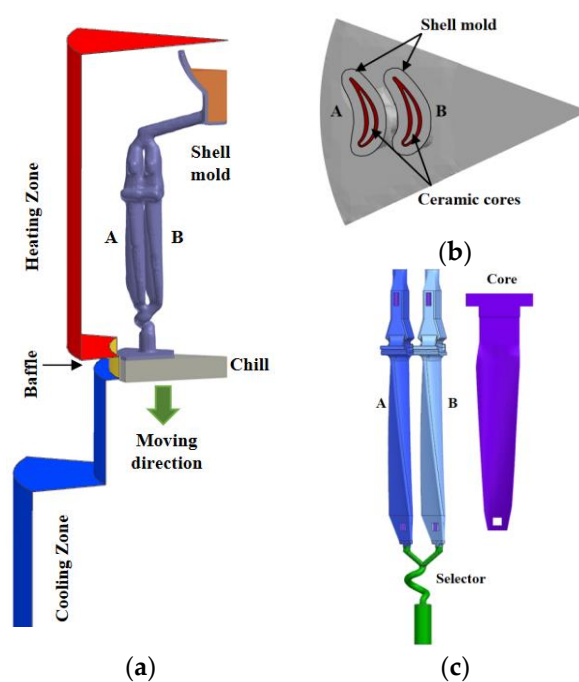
Numerical model for temperature field calculation: (a) Schematic diagram of the mold and casting assembly positioned in the Bridgman furnace; (b) Cross-sectional schematic of the casting within the ceramic shell; (c) Geometry of the casting and ceramic core.
